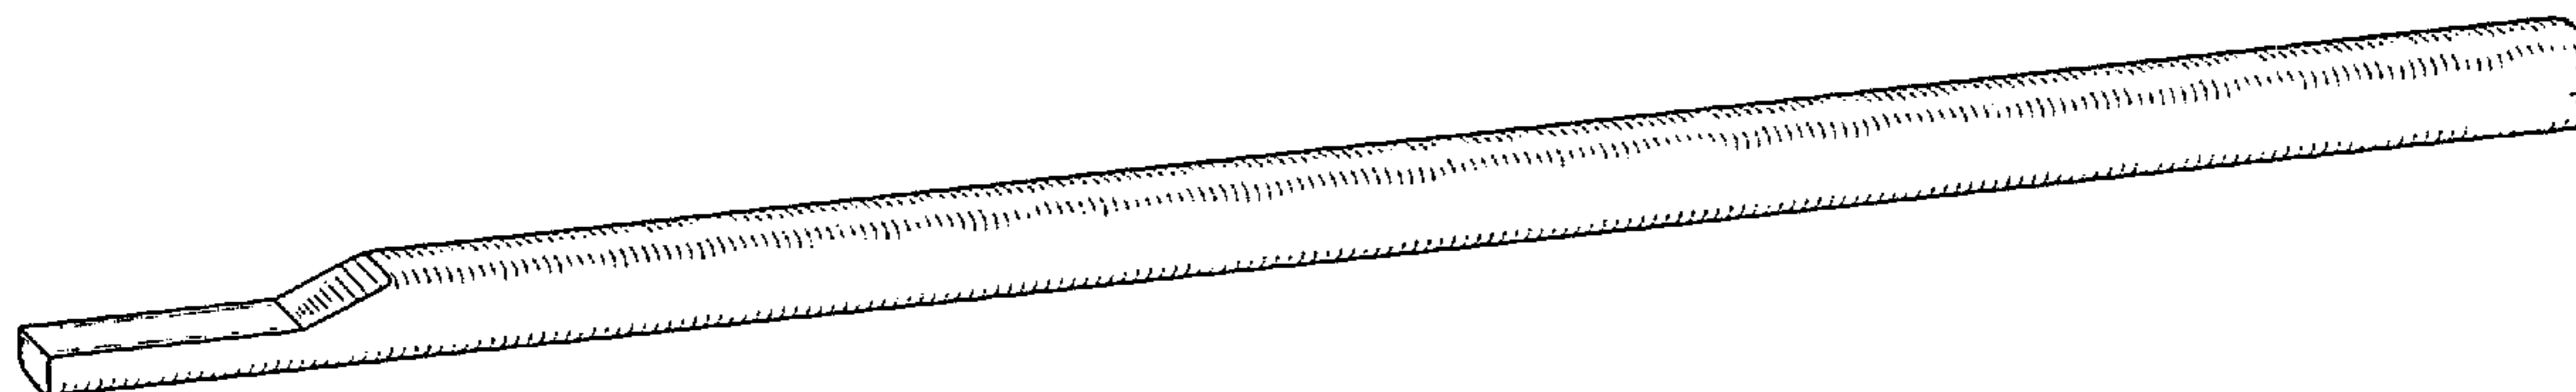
is a left side plan view of the motorcycle maintenance tool of FIG. 1.
